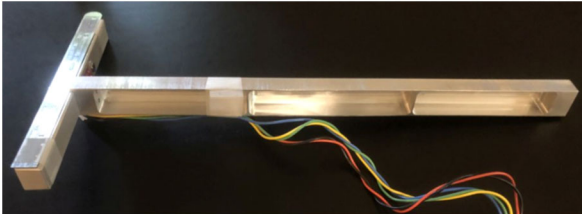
CNC machined C-section beam and tilt sensor fitted on cross-bar
